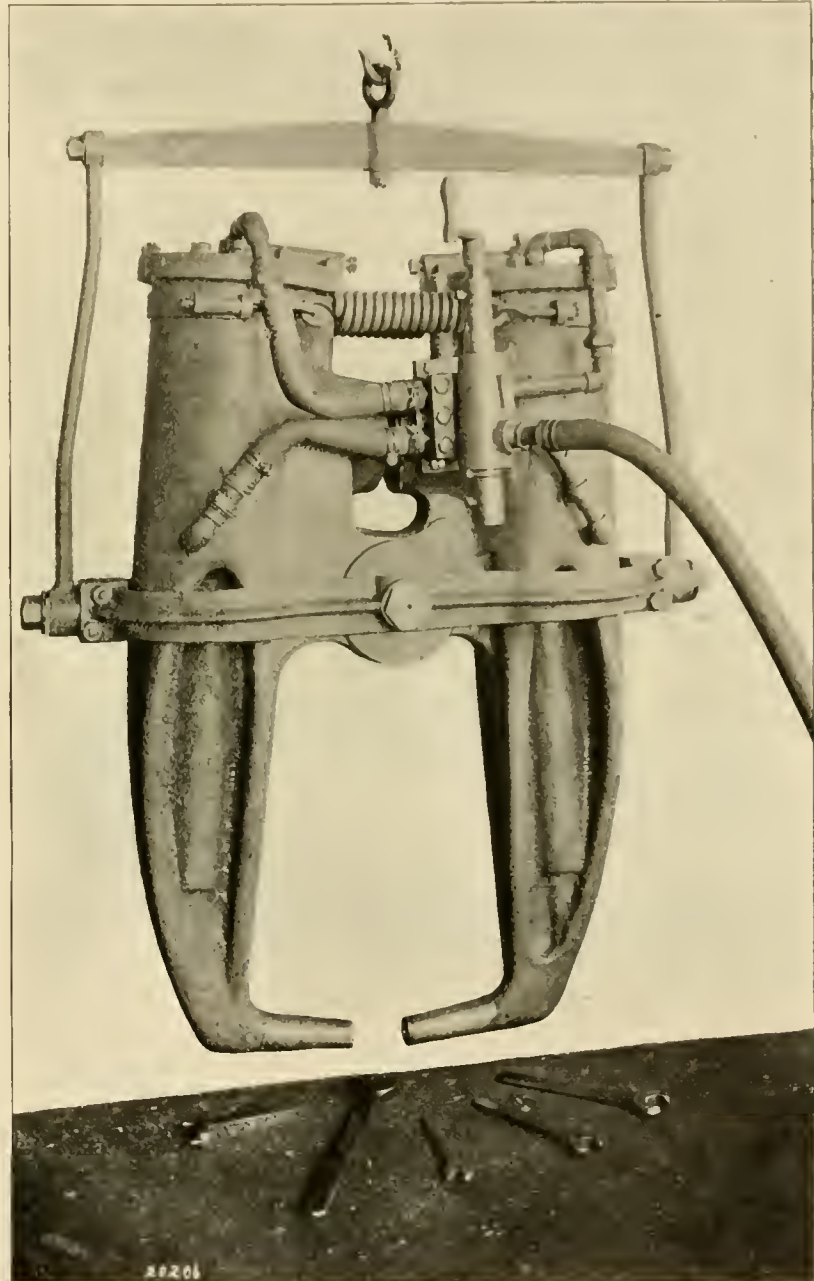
PNEUMATIC-HYDRAULIC RIVETER.
